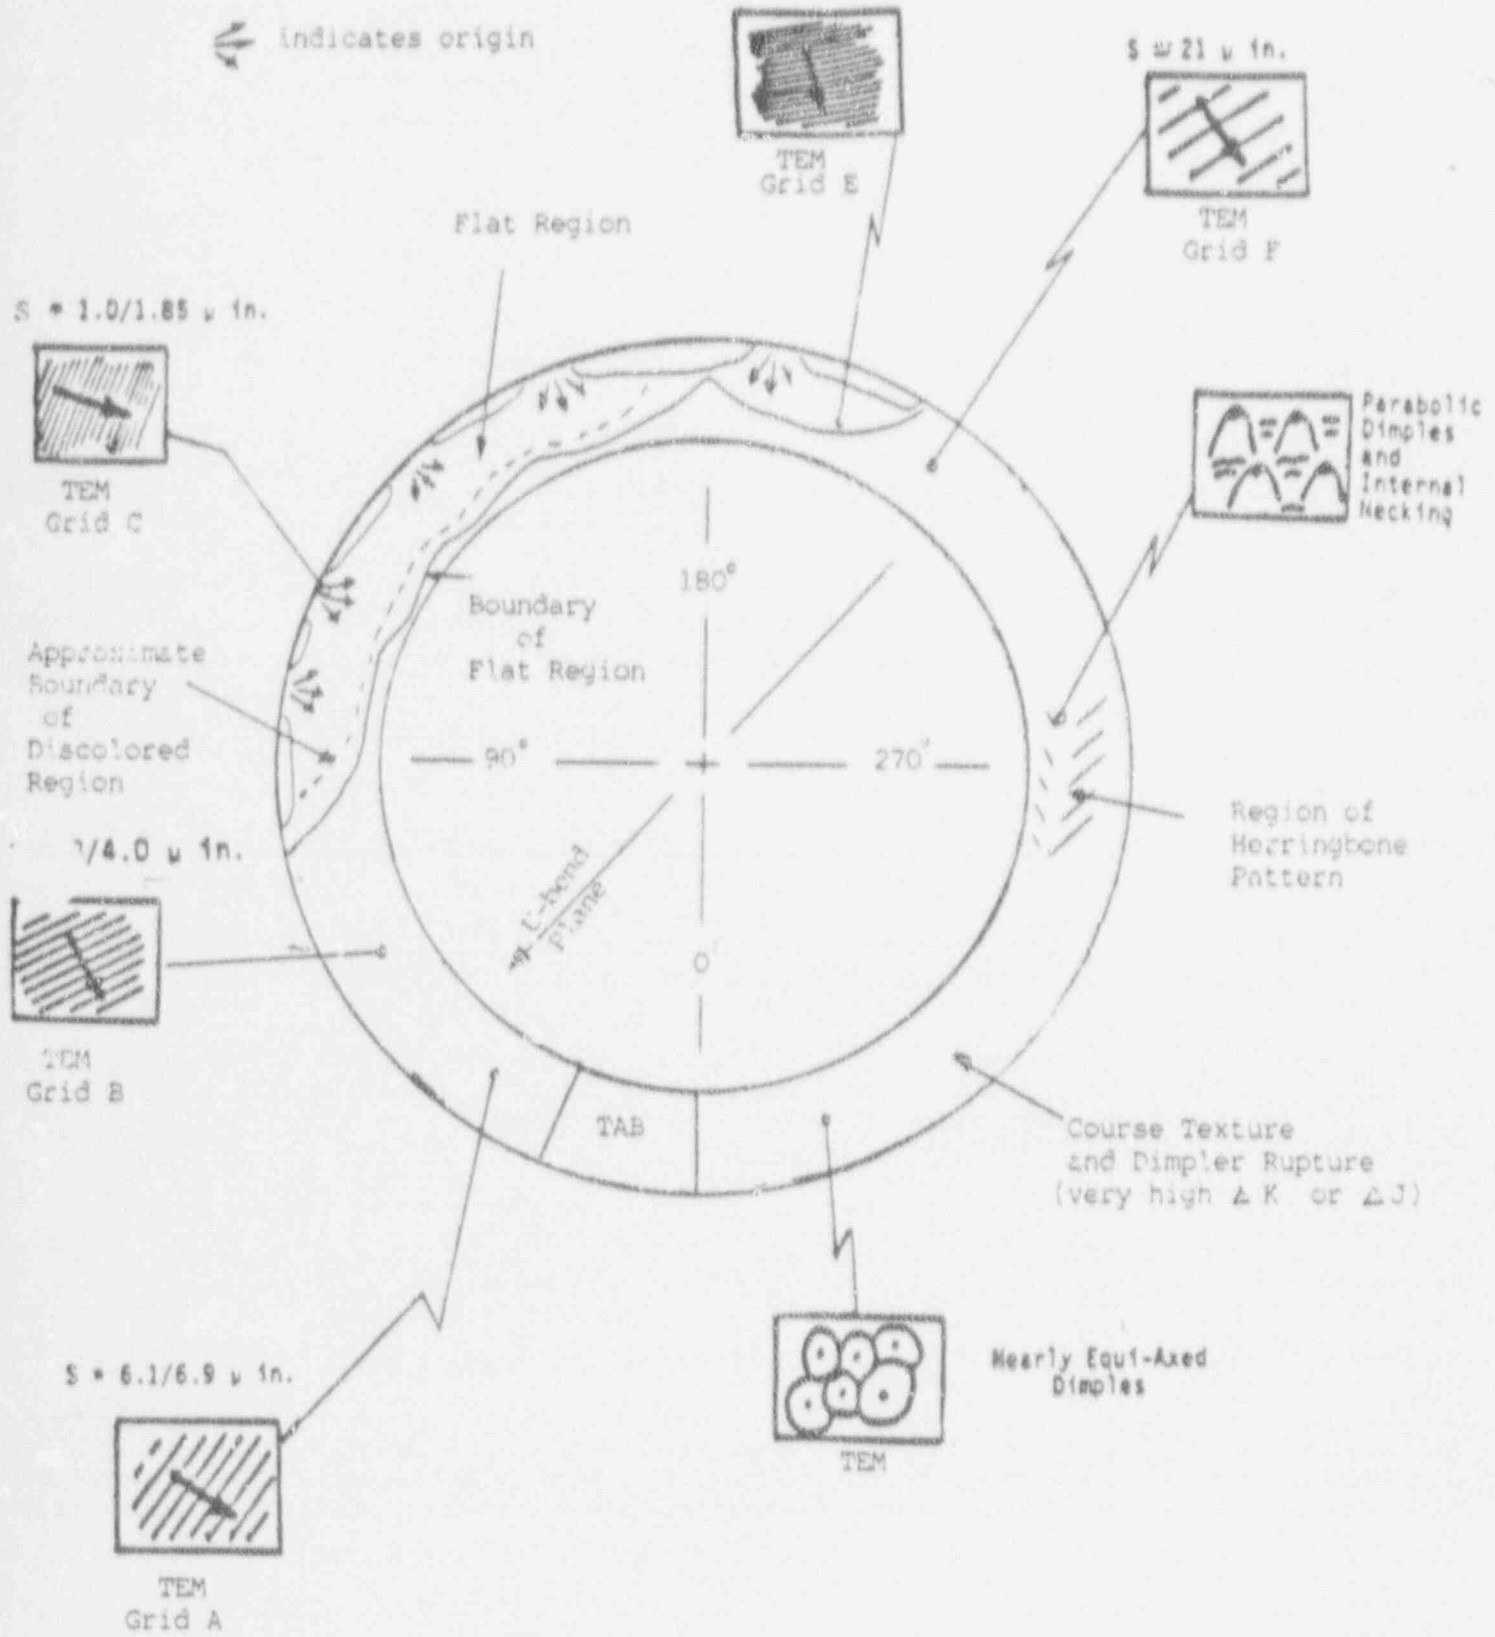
Approximate mapping of fracture surface of tube R9-C51, S/G c
